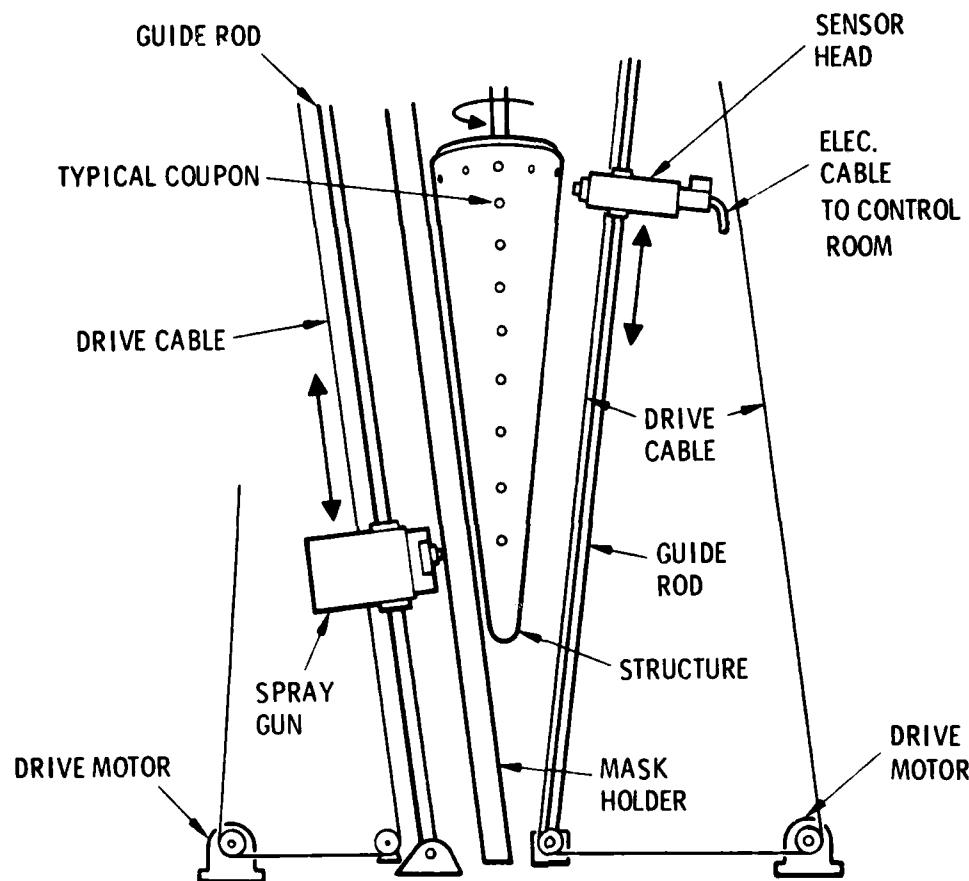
SPRAY GUN & SENSOR HEAD SETUP
